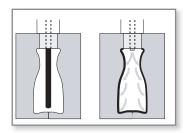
Intermittent extrusion blow molding. The parison is extruded within the mold cavity (left) and inflated with air pressure (right).
